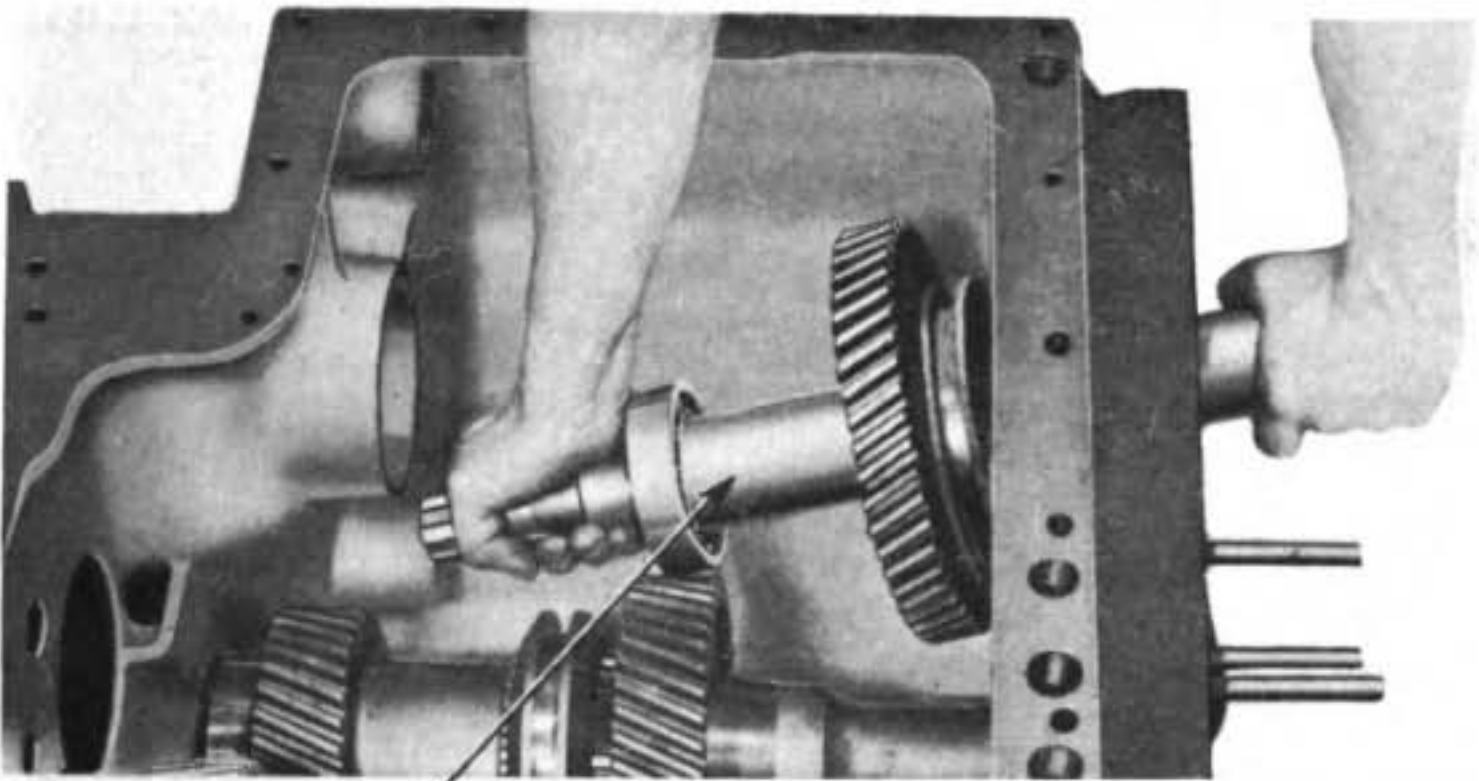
Removing Transmission Winch Drive Shaft Front Bearing Lock Nut
